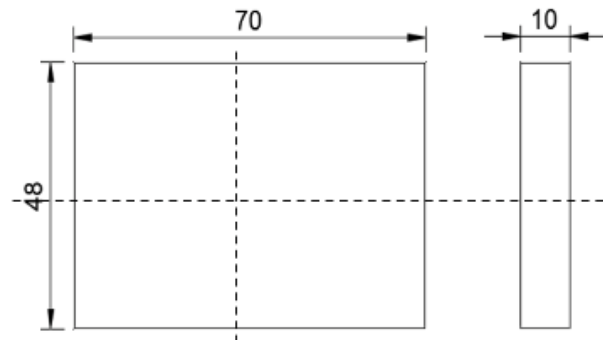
The parts dimensions obtained from biodegradable materials through injection moulding
